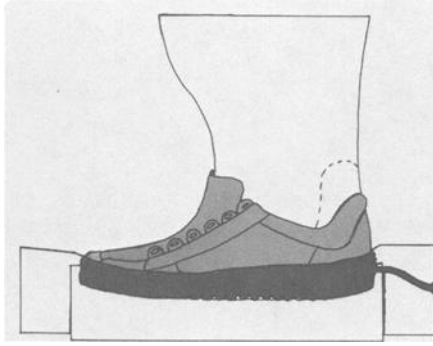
Outsole material is injected through heel area, forming the outsole in one-step direct attach operation.
